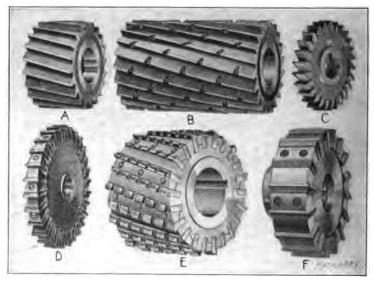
Cylindrical, Side, and Face Milling Cutters
